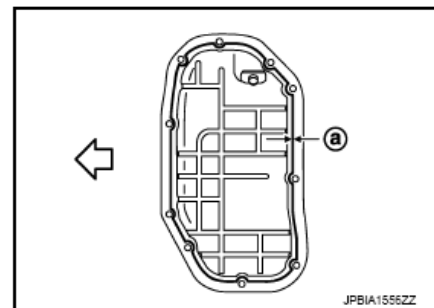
Identifying Liquid Gasket Application Area On Lower Oil Pan
